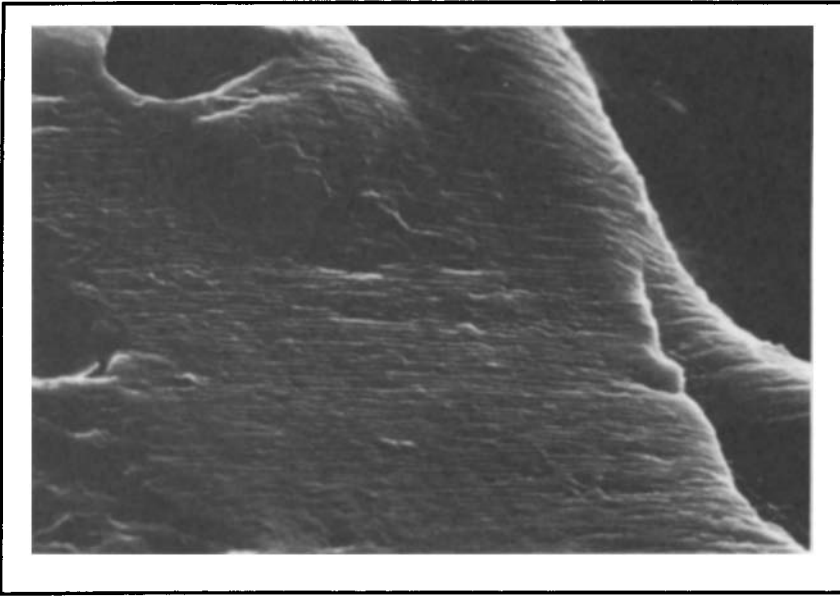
SEM secondary electron image showing fatigue fracture in 2024 aluminum (4600 \times). (Courtesy of Boeing Commercial Airplane Co.)
